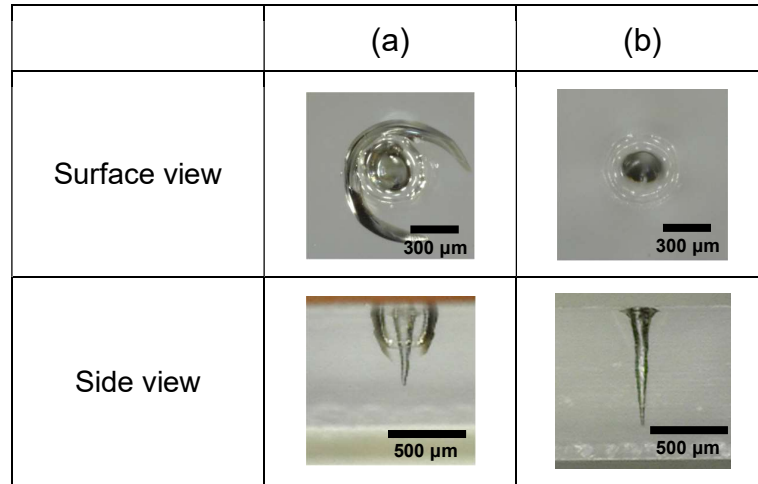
Sample hole images. (a) Hole with crack. (b) Crack-free hole.
